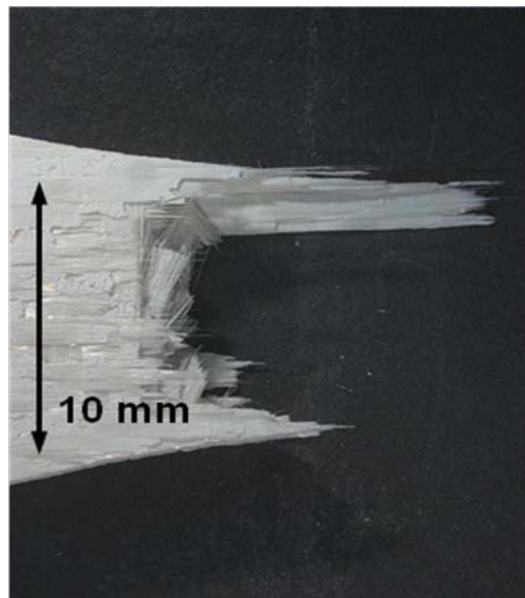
Fracture surface of the N720/AM specimen tested in tension to failure at 1000°C in laboratory air.
